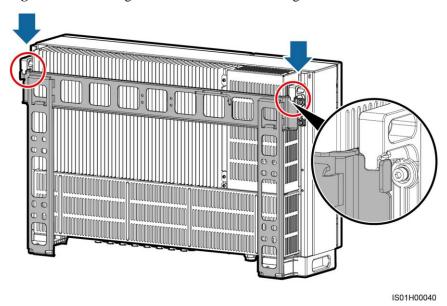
Mounting the SUN2000 onto a mounting bracket
